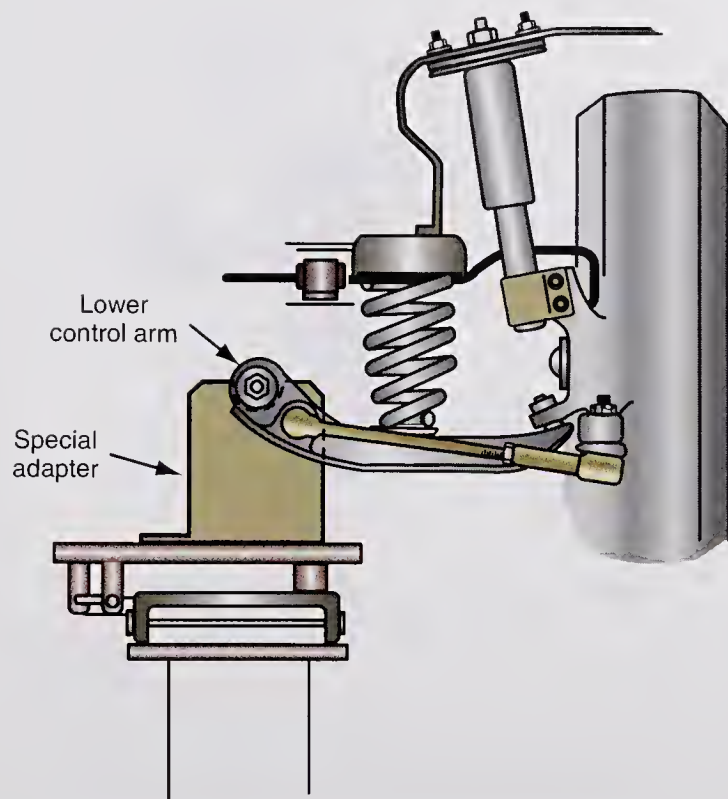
Special tool installed to support the inner end of the lower control arm.
